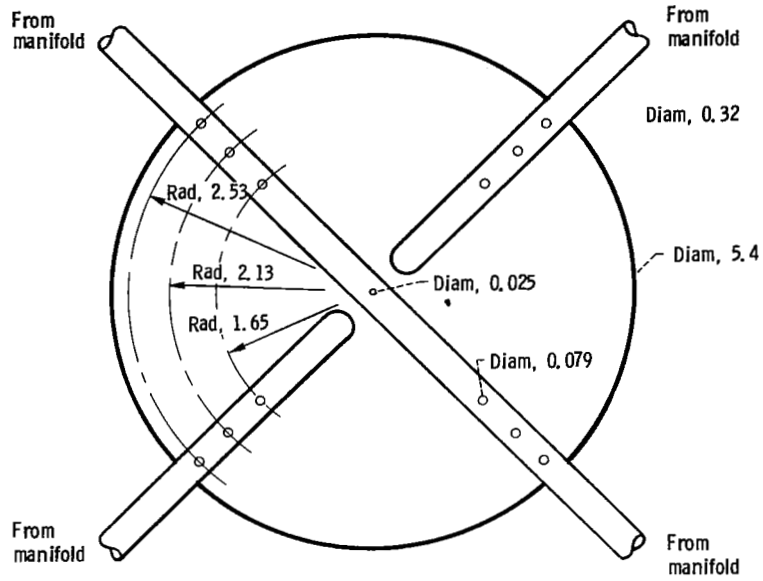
Fuel injector, View looking downstream (dimensions in cm).
